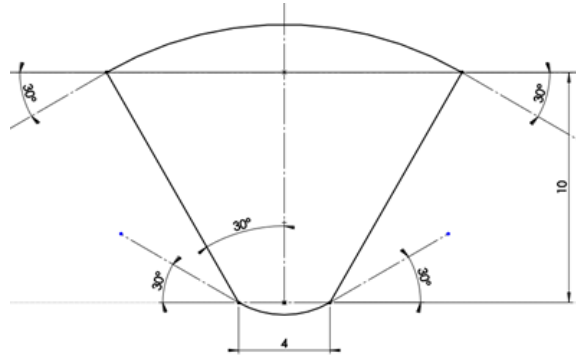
Cross section view of the modeled weld geometry according to IIW recommendations for ENS method.
